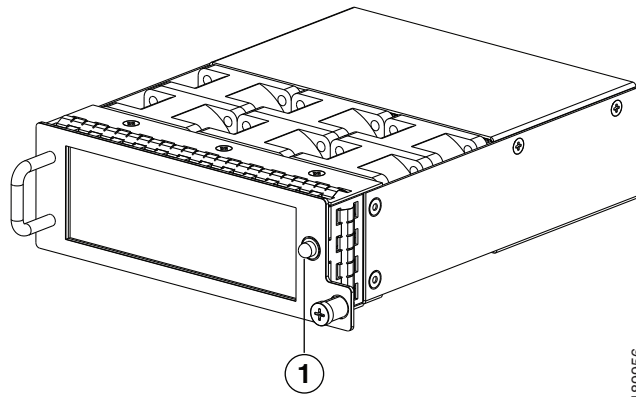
Blank Power Supply Filler Panel (N10-S1BLKP= Shown)
